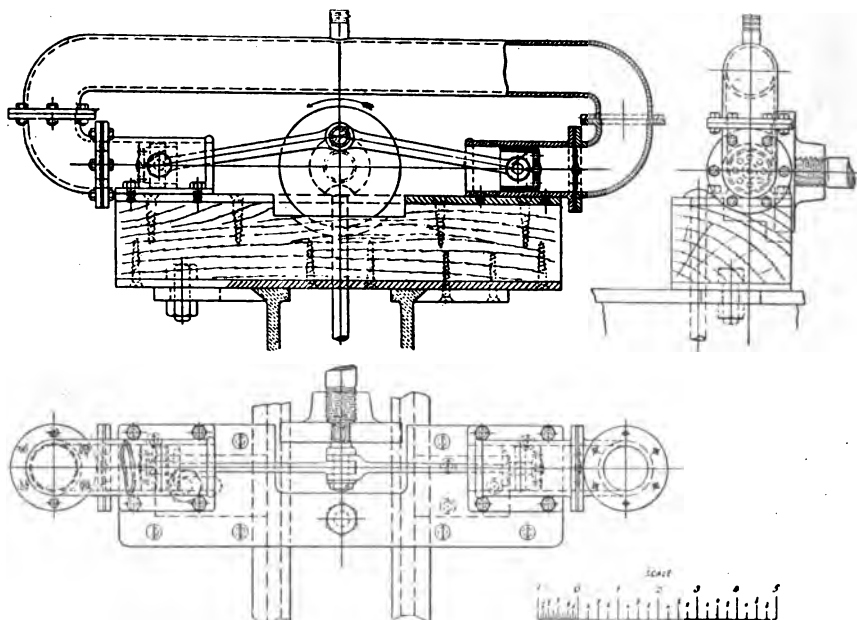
GENERAL ARRANGEMENT OF AIR COMPRESSOR.
